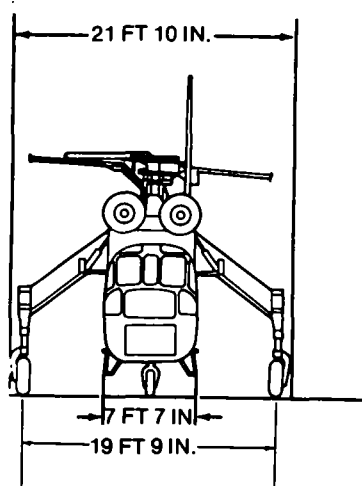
Principal Dimensions, CH-54B (Tarhe)
